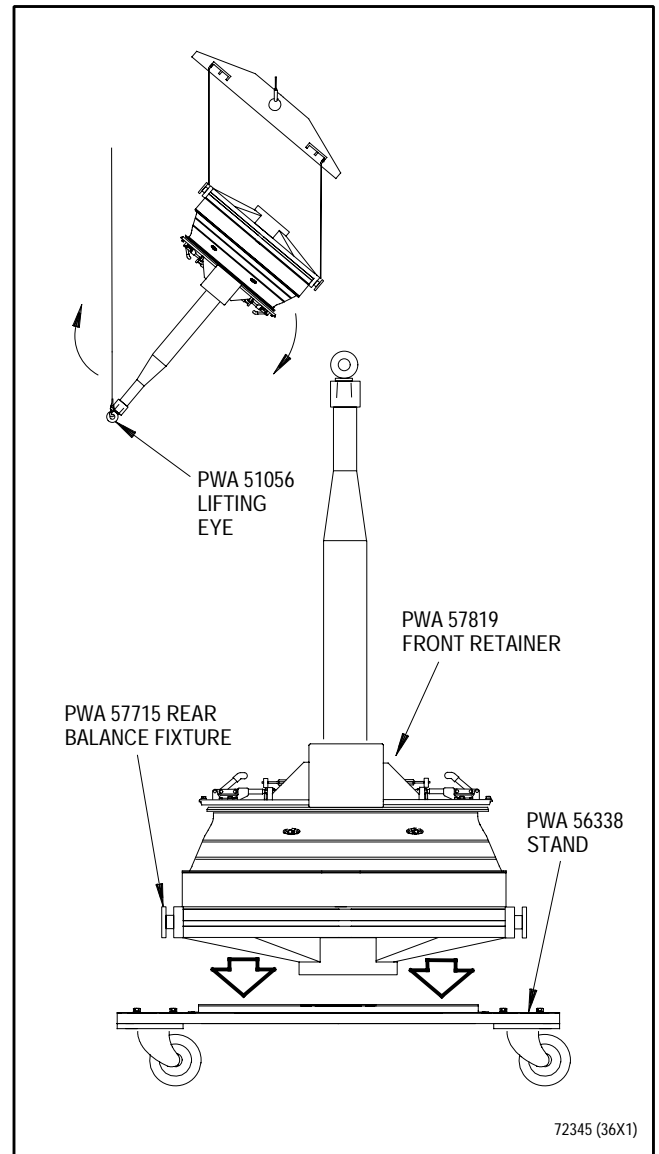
Front Compressor Drive Turbine Rotor and Stator - Installation into PWA 56338 Stand (Sheet 8 of 9)
